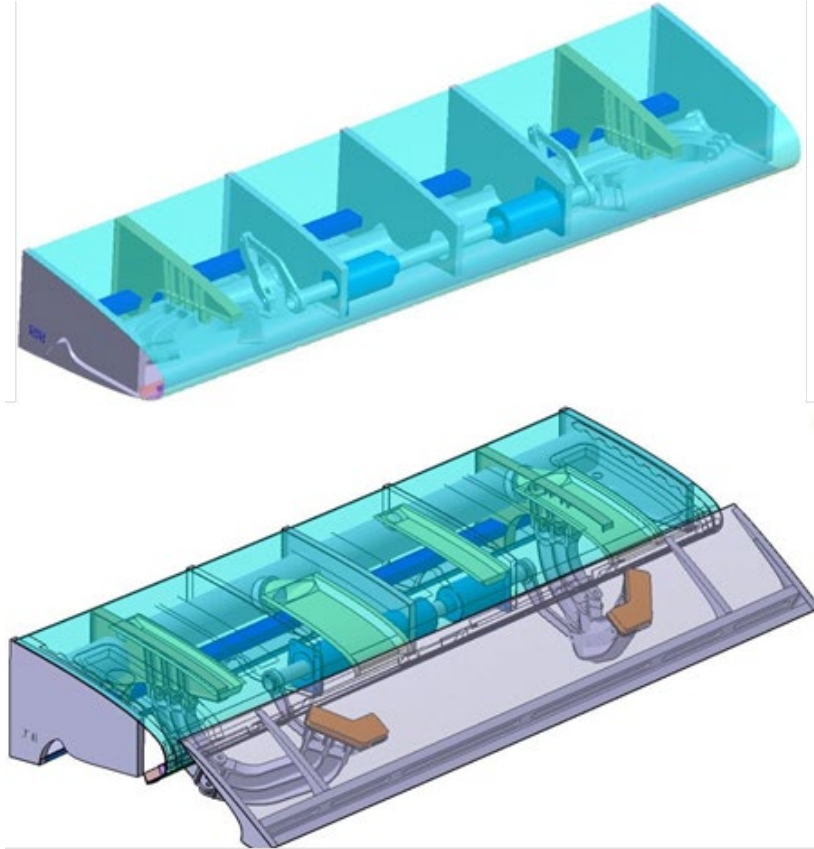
Krueger Flap and “Butterfly” Mechanism – Retracted-Deflected Position Axonometric view
